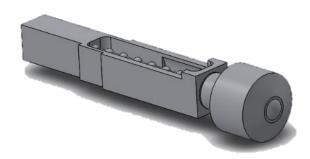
The ball burnishing equipment (Buldum and Cagan, 2017)
